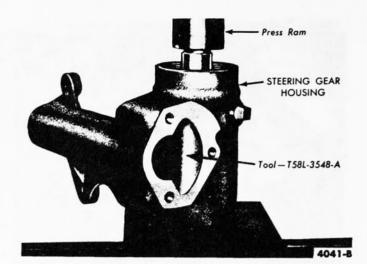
Steering Shaft Lower Bearing Cup Installation
